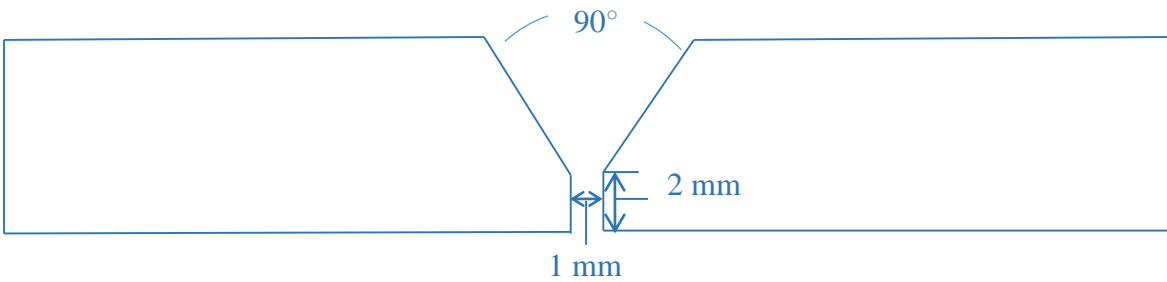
Sample for MIG, TIG, MMA Welding
